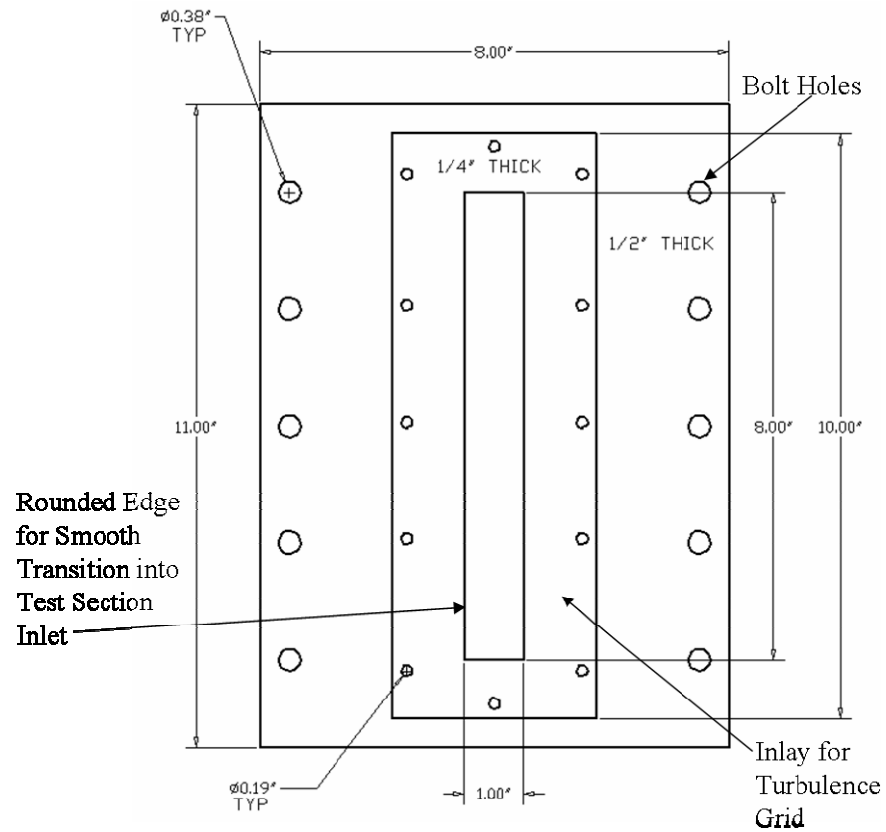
CAD drawing of shock tube flange piece without turbulence grid.
